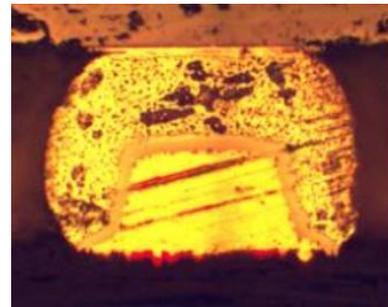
Good Soldering of a Damaged LF1 Bump With 1.5 mil Thick Flux
